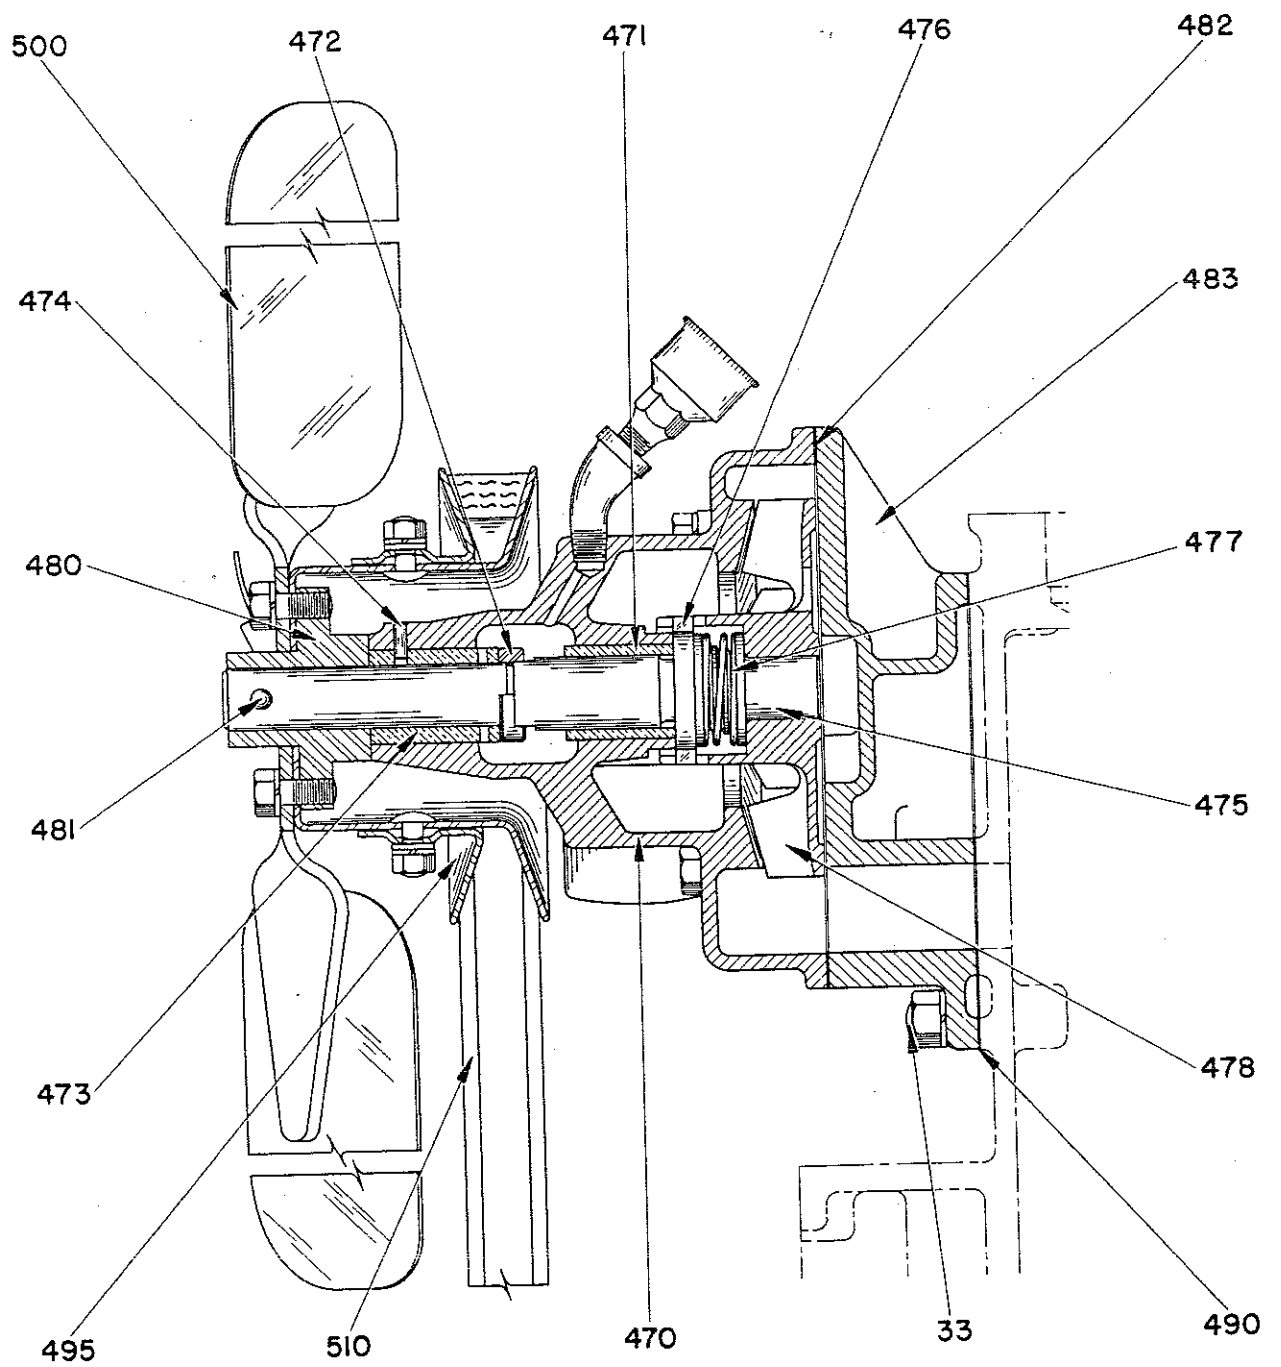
Cross Section through Water Pump (Up to Serial No. 165842)
